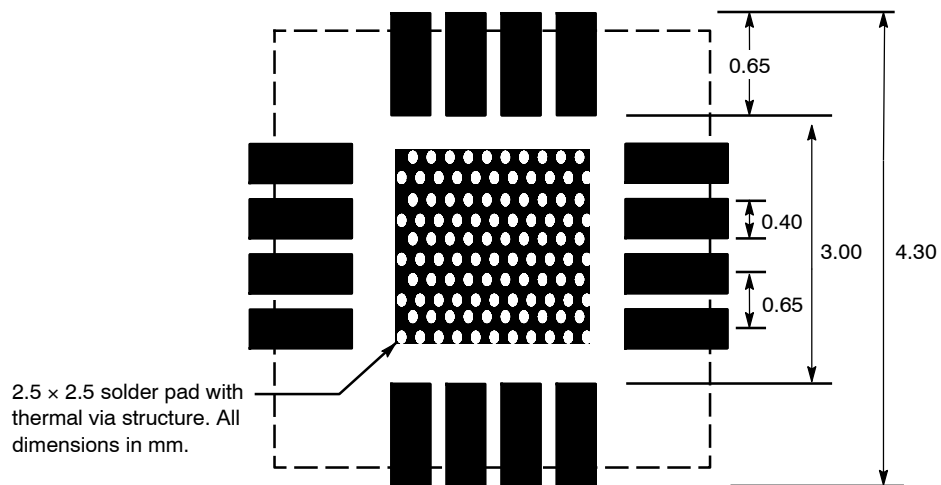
PCB Pad Layout for 16-Lead QFN 4 x 4
